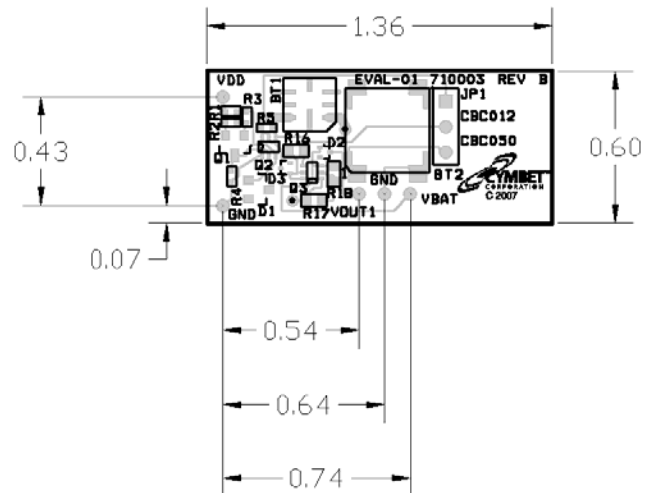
EVAL-01 through-hole and board dimensions in inches.
